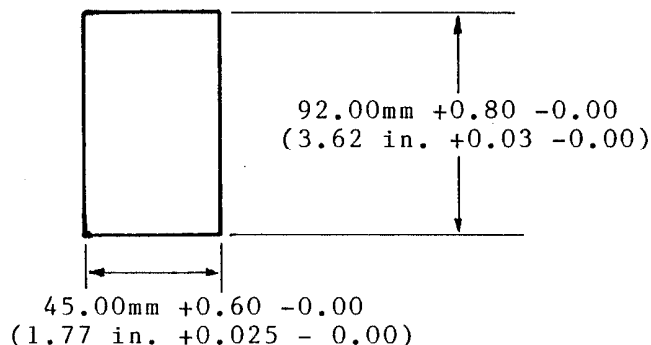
PANEL CUT-OUT DIMENSIONS
